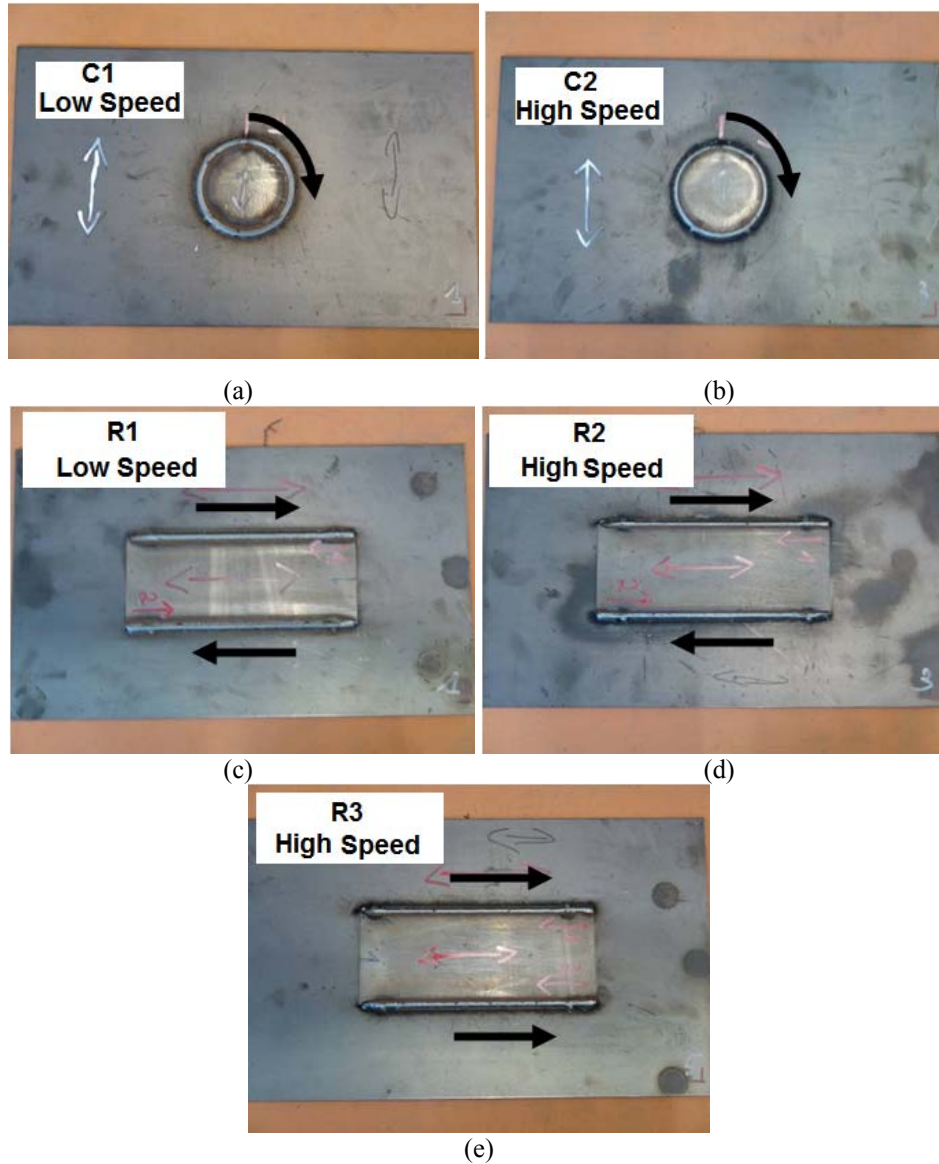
The welded samples: C1 (low speed), C2 (high speed), R1 (low speed with opposite welding directions), R2 (high speed with opposite welding directions), R3 (high speed with the same welding directions).
